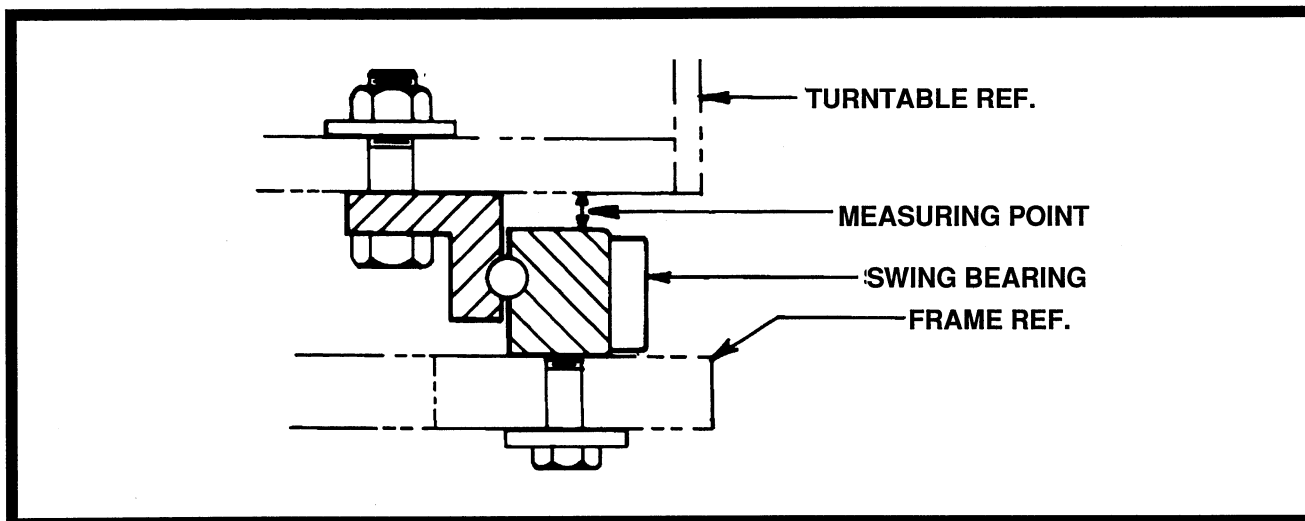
Swing Bearing Tolerance Measuring Point.
